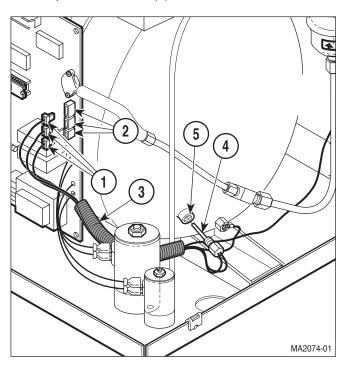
Temperature Sensor Assembly Removal / Installation
